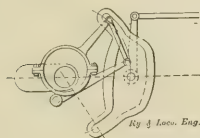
CRAMPTON'S EXPANSION GEAR.
